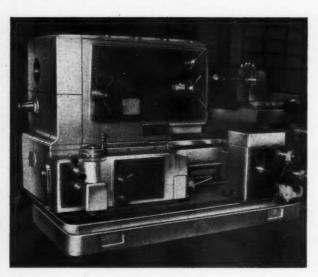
An IMOR type MHS lathe, of 450 mm. (17-716 in.) centre height, is here being checked for run-out of the spindle. The machine is fitted with a Synchromatic feed gearbox
